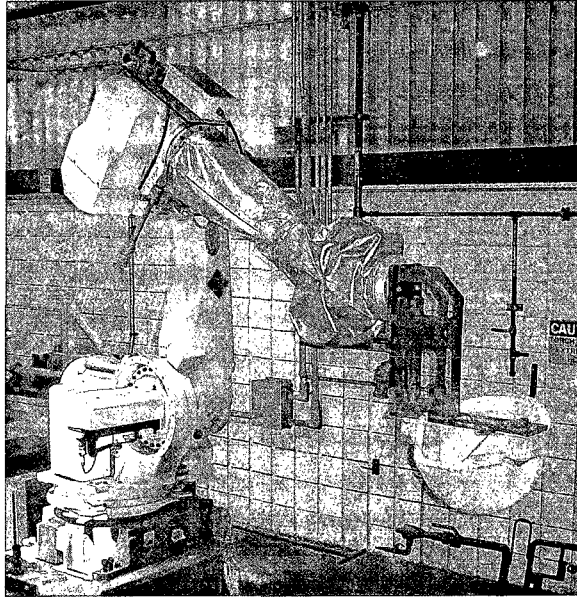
ABB robot used to pour test bar castings, shown with a large ladle used in casting cylinder aluminum heads.
